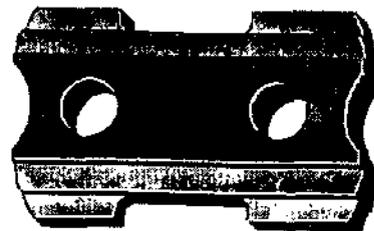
Serrated hammer, available for certain types of grinding jobs.
